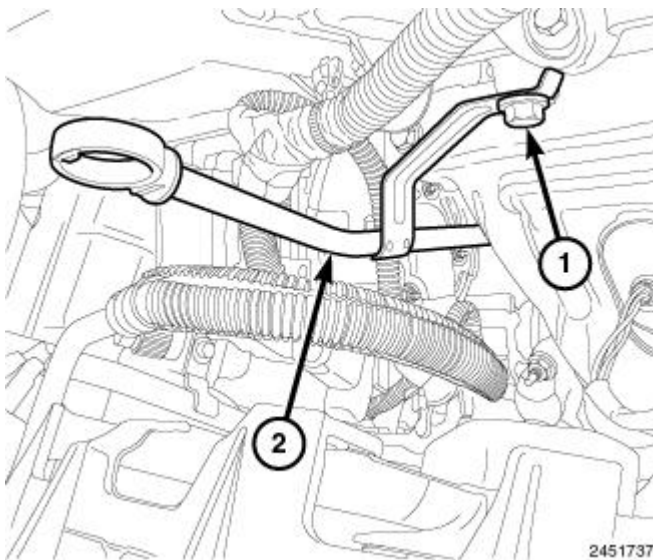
Identifying Oil Dipstick Tube & Bolt
